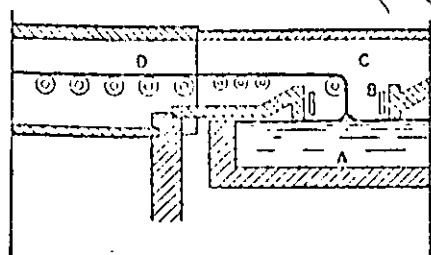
LOF-Colburn process continuous flat sheet drawing machine. A. Shallow drawing pot; B. Sheet coolers; C. Bonding roll (or rollers); D. Horizontal lehr.
